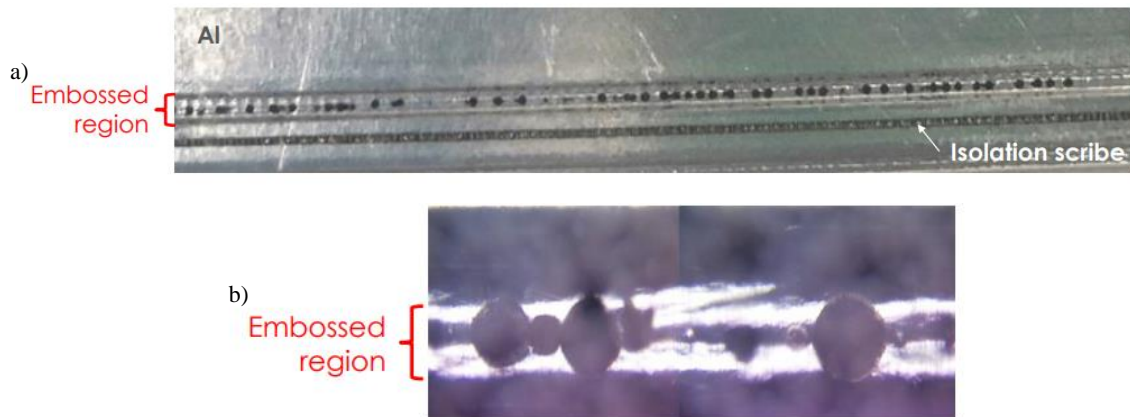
Laser weld spots on module a) top-down photograph b) optical microscope image
